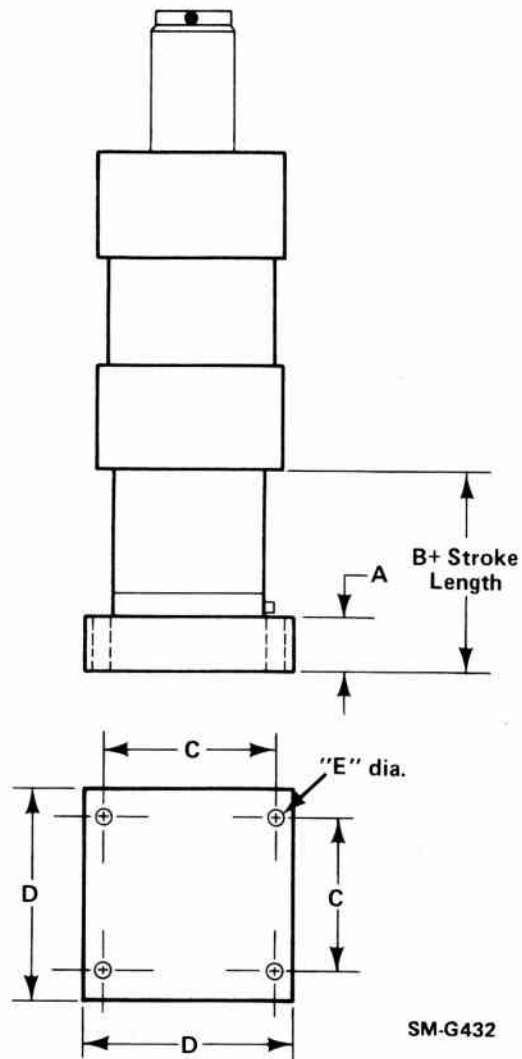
Series 244 Actuator with Pedestal Base and Closed Housing LVDT
